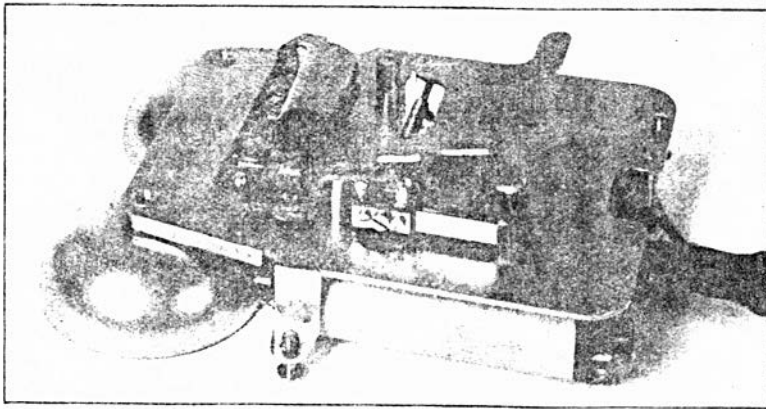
CHASSIS WITH LARGER TYPE KEY UNIT MOUNTED IN POSITION.
